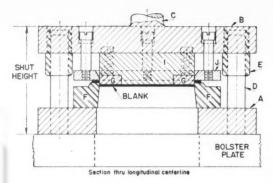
Illustration showing a plain blanking die in which a spring-pad stripper plate attached with sliding stripper bolts has been incorporated.
